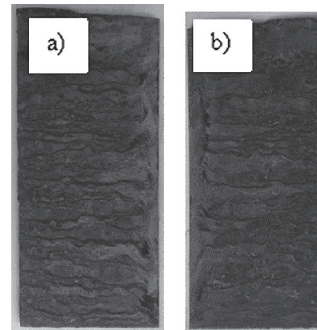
Sample macrostructure 7, a) middle part, b) final part.
